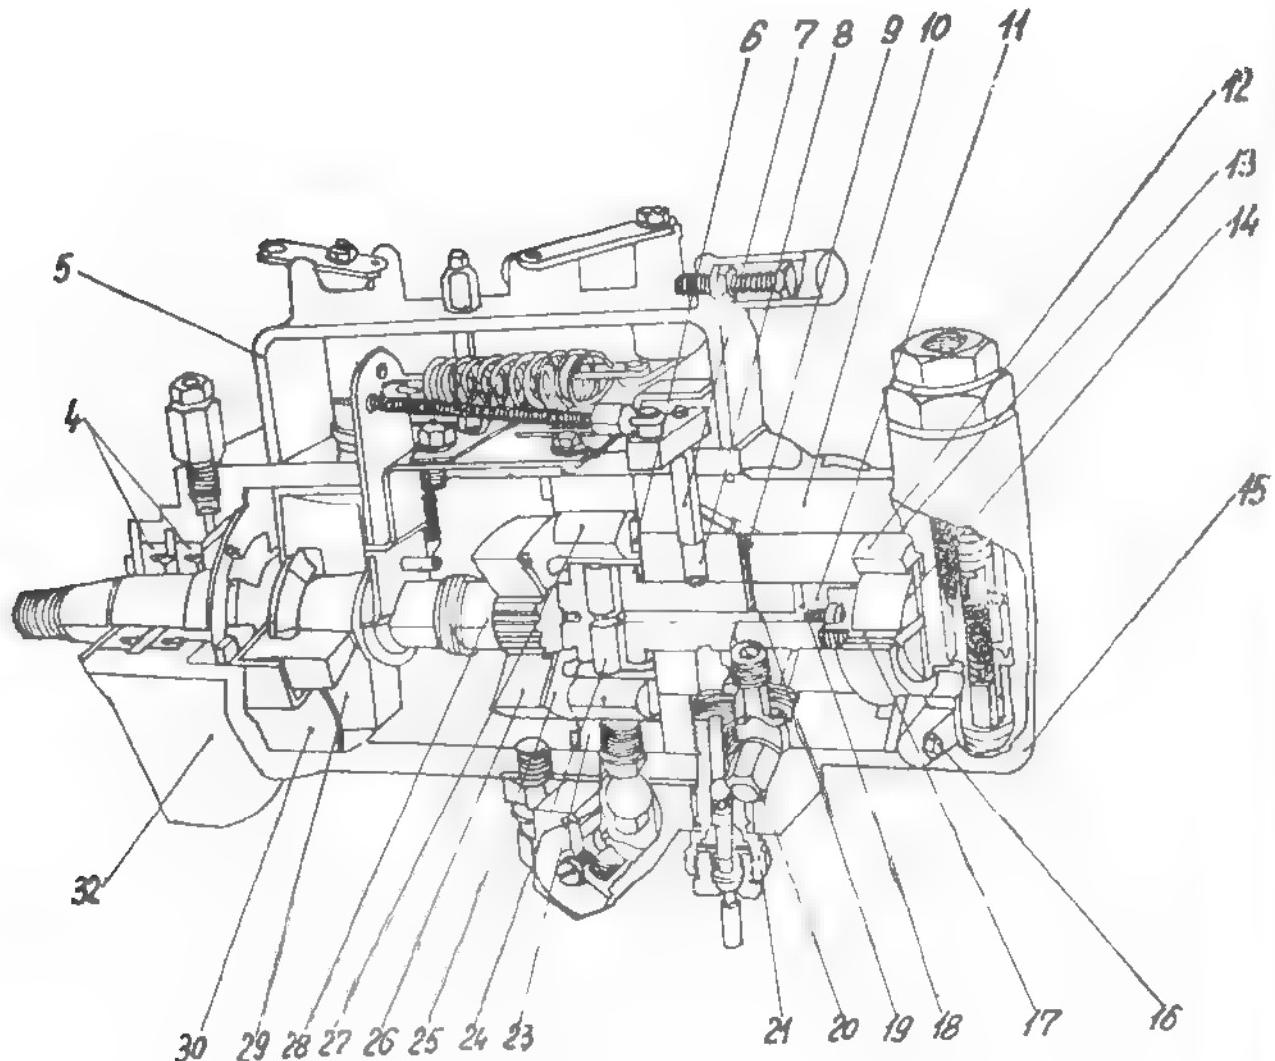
DIESEL FUEL INJECTION PUMP
